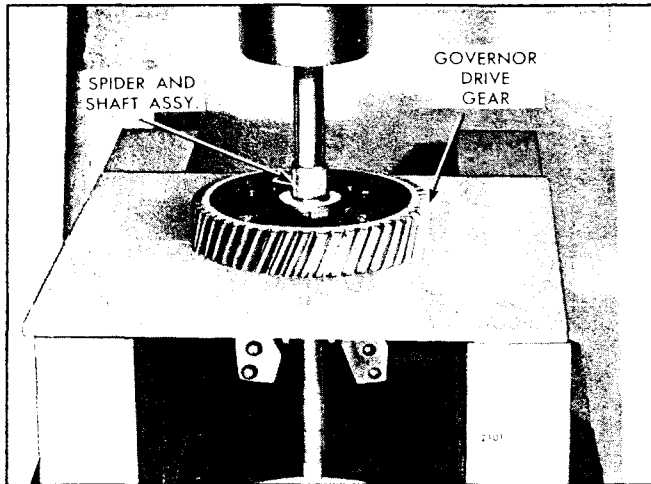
Removing Drive Gear from Spider and Shaft Assembly
